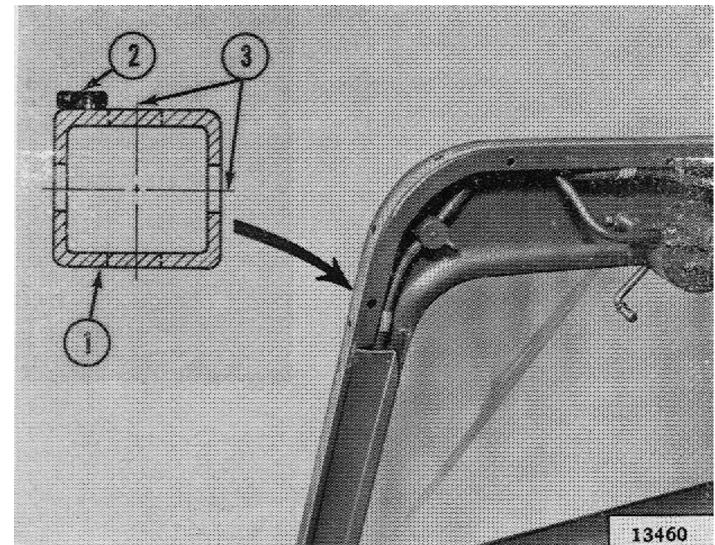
A5 WINDSHIELD FRAME PREPARATION
